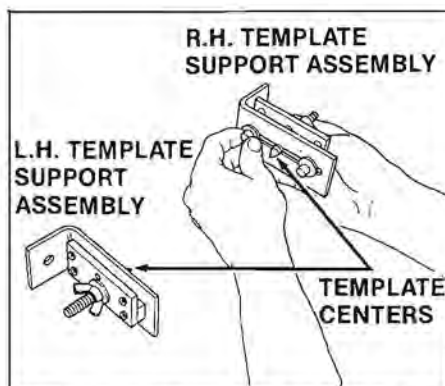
Attach each template support assembly to a bracket, making a left-hand and a right-hand template support assembly.
